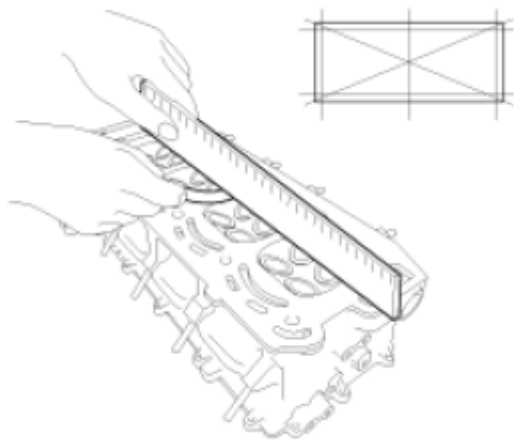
Measuring Surface Contacting Cylinder Block And Manifolds For Warpage Using Feeler Gauge And Straight Edge
